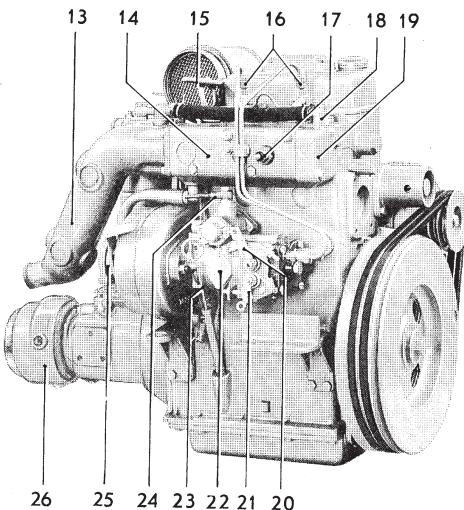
MD6A, with MS reverse gear and reduction gear, starboard side
